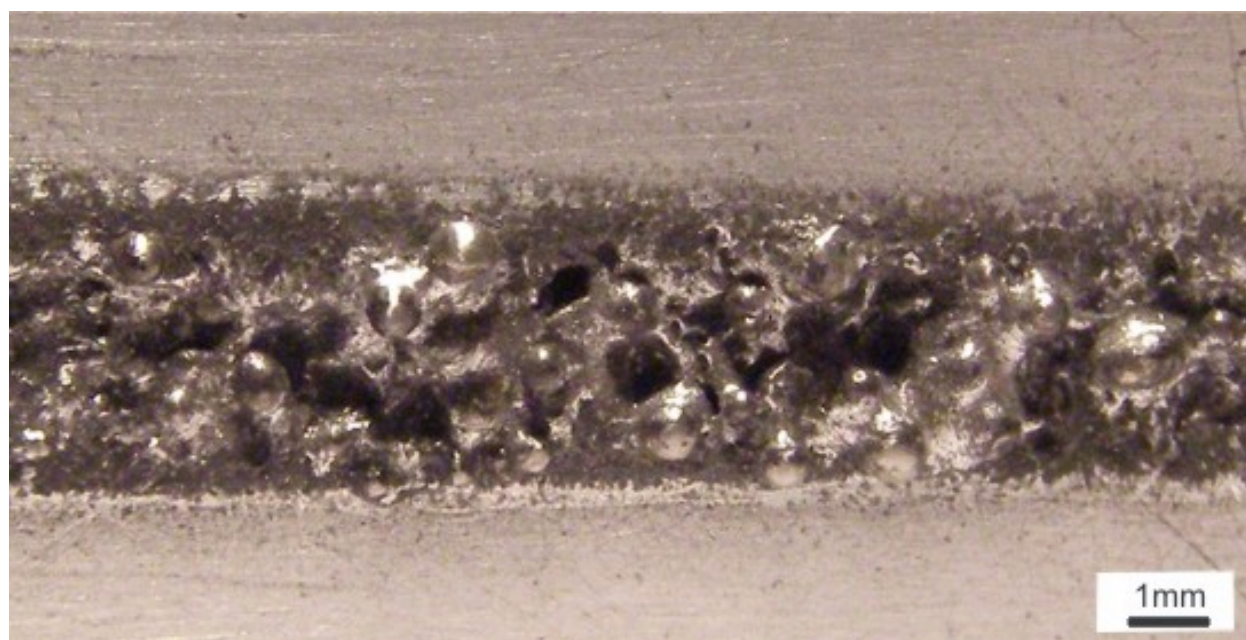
View of the MCMgAl9Zn1 casting magnesium alloy face of weld after laser treatment with TiC, scan rate: 1.0 m/min, laser power: 2.0 kW
